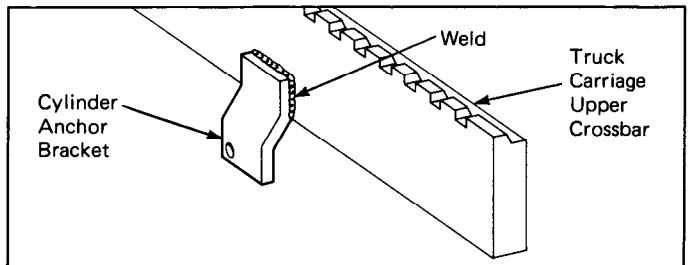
Weld the Top and Sides of Anchor Bracket
